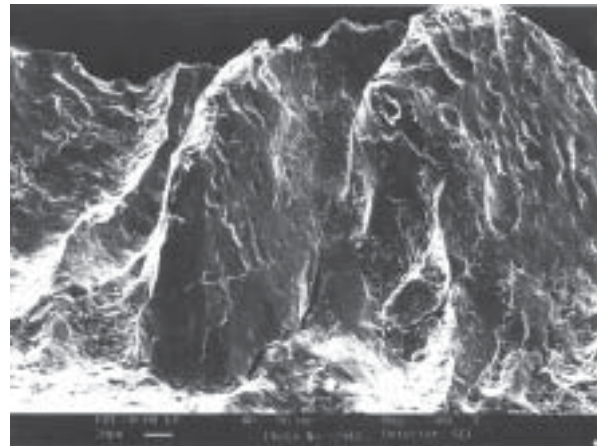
Magnified view of the rectangular region marked in Fig.14 showing intergranular fracture.
